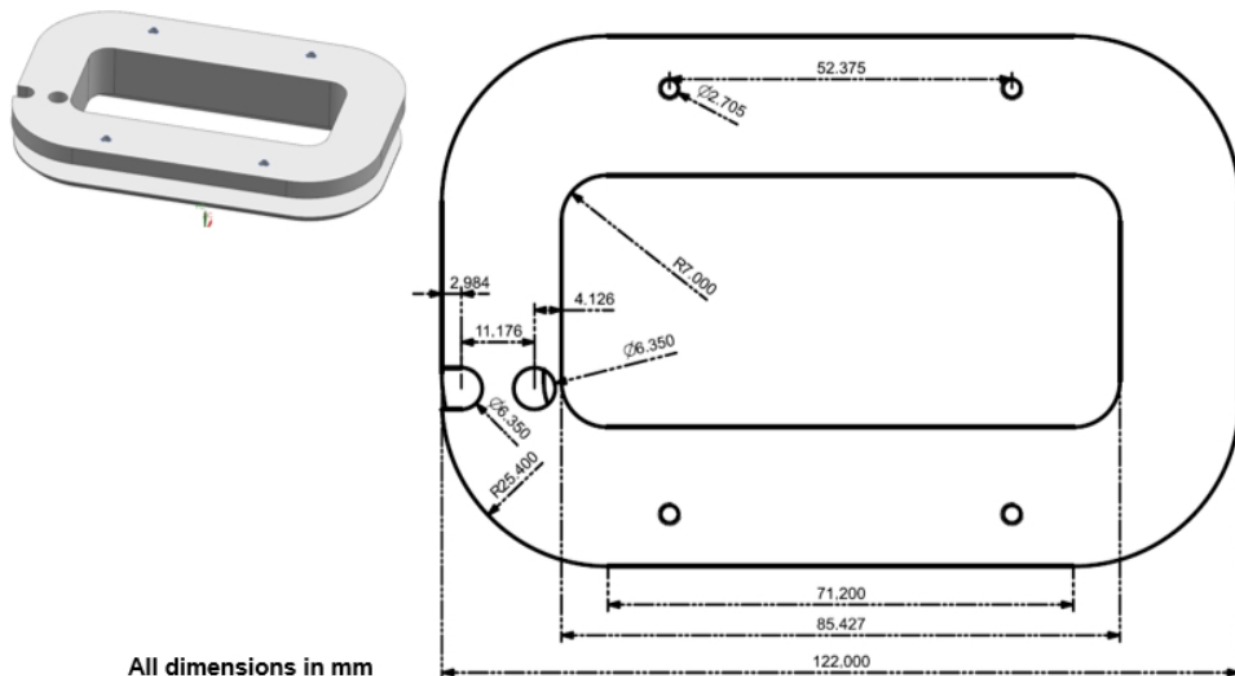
Top view of the design model and the detailed dimensions of the MQW coil bobbin.
